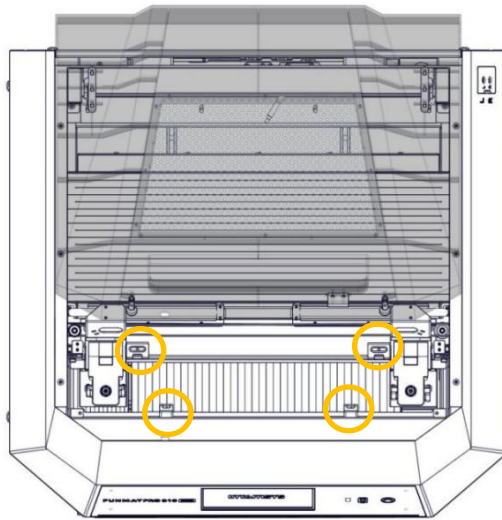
Positions of X-axis and Y-axis Fixing Blocks
